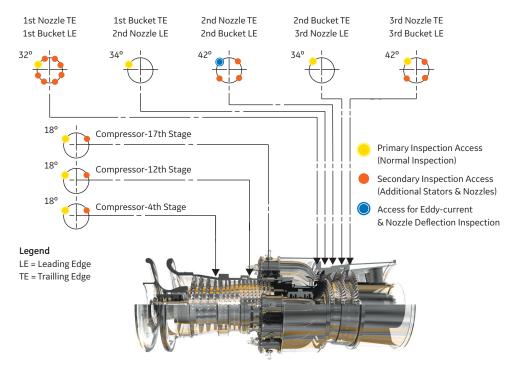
7E.03 gas turbine borescope inspection access locations
